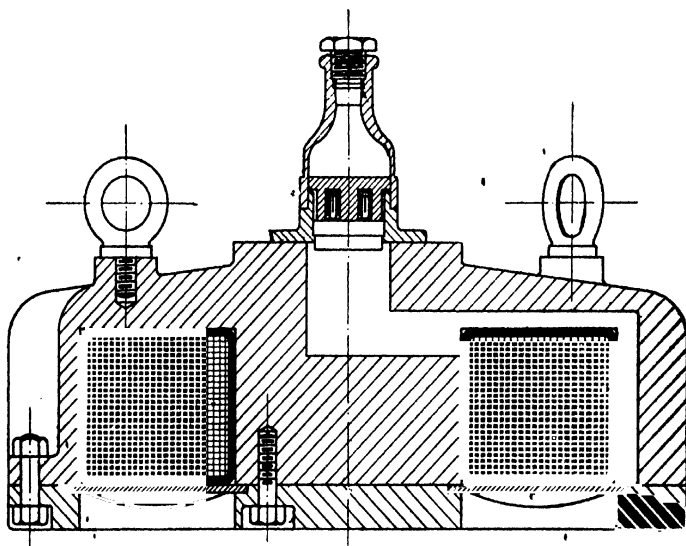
SECTIONAL VIEW OF LIFTING MAGNET.
